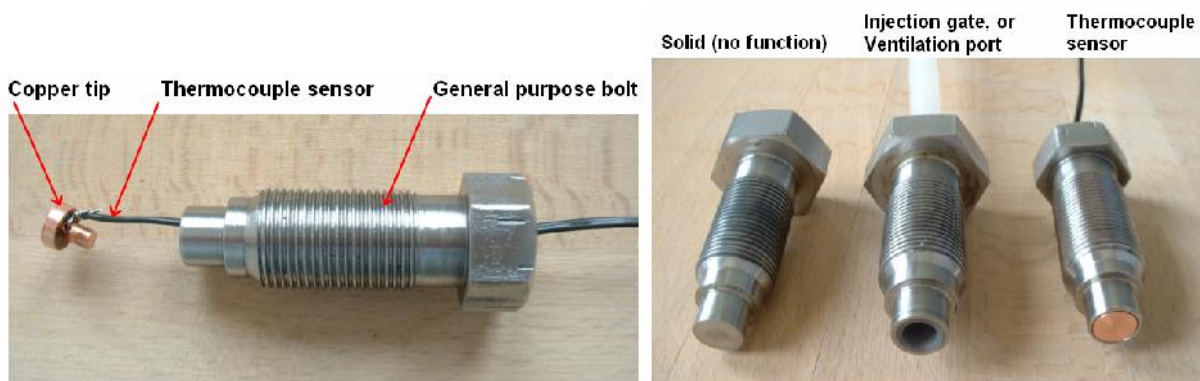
A thermocouple sensor and multi-functional bolts to be used on the lower mold part.
